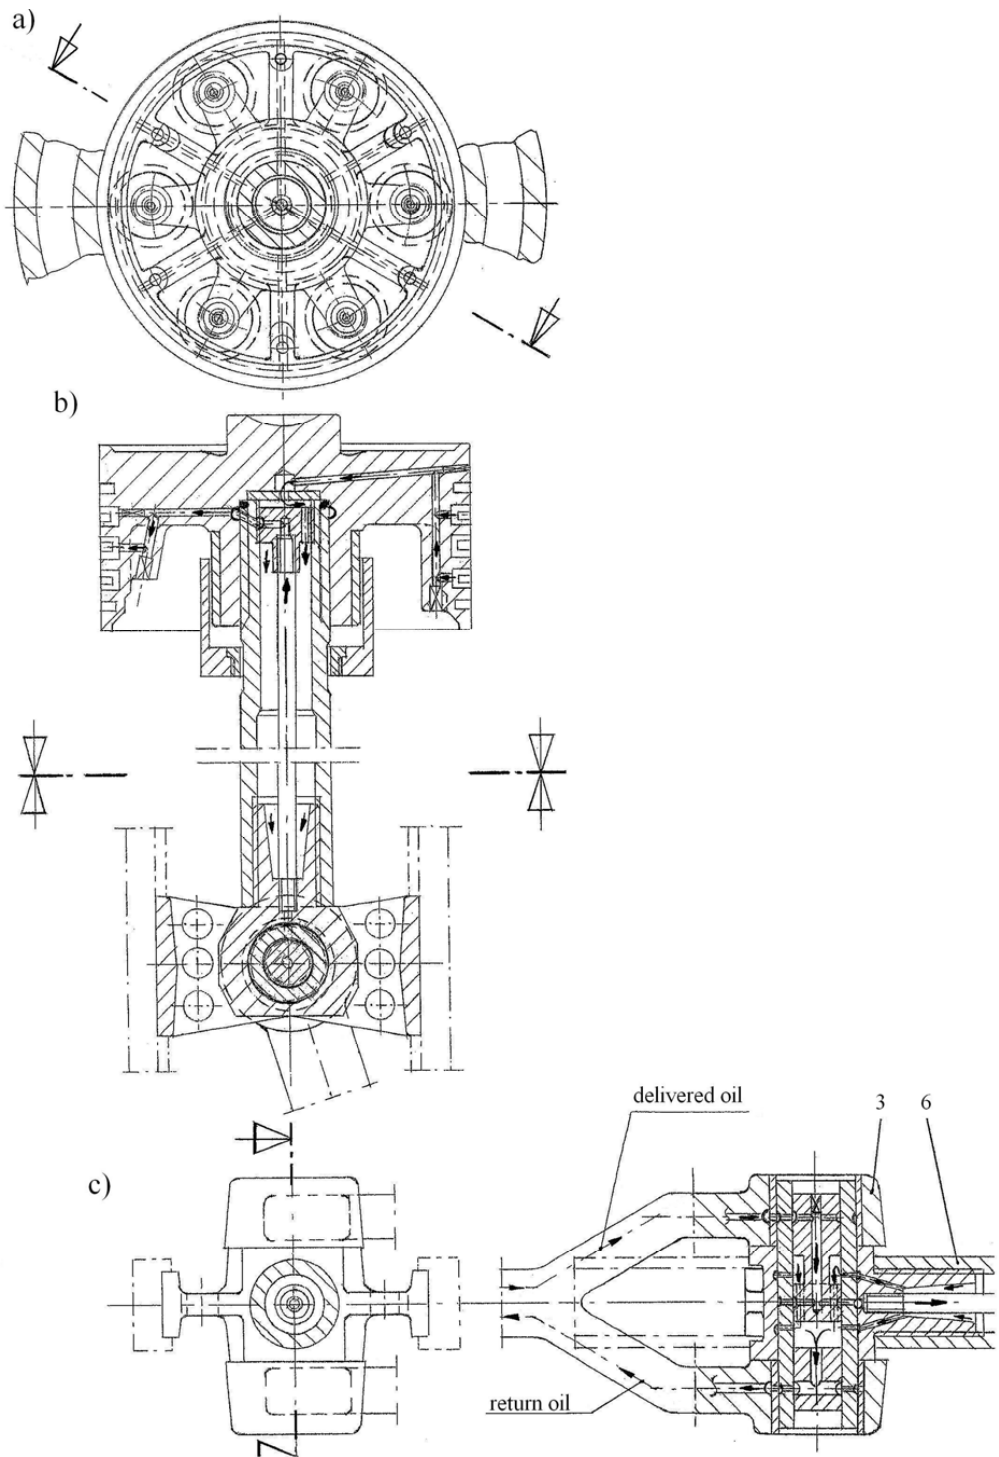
The piston lubrication system: a) cross-section of the cylinder and the piston; b) axial section of the piston, the piston rod and the crosshead; c) axial section of the crosshead and the articulated connecting-rod
